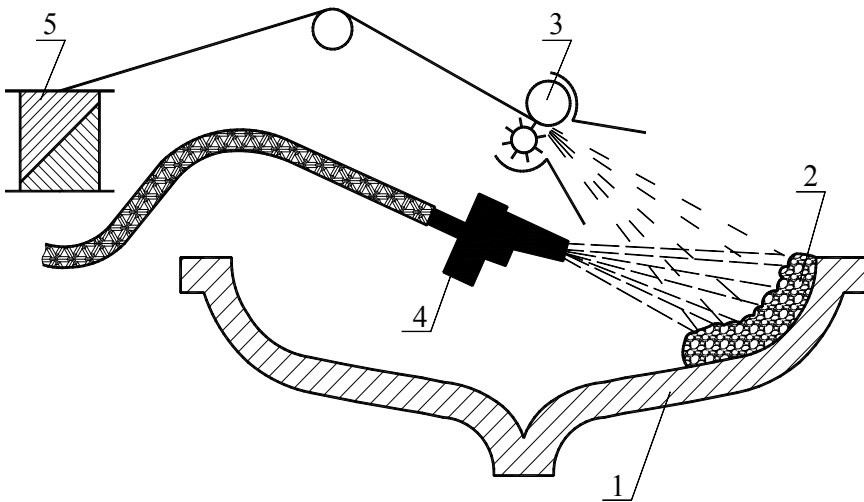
Production from fiberglass by spray technology: 1 – form; 2 – laminate; 3 – cutting unit; 4 – spray gun; 5 – bobbin [own study]
